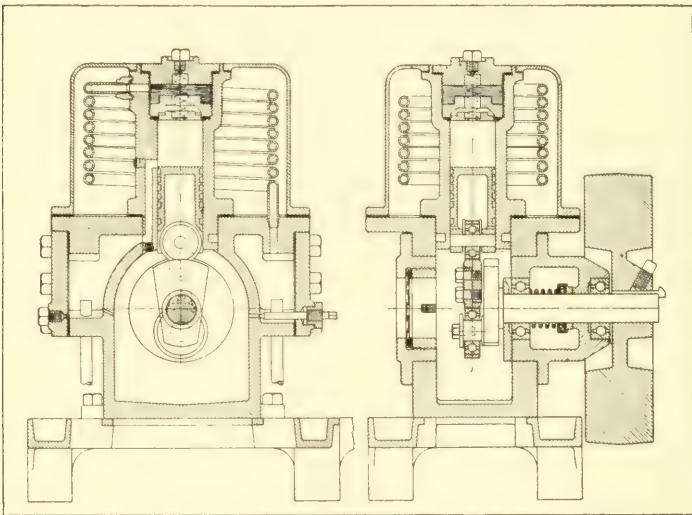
SECTIONAL VIEW OF COOKE REFRIGERATING MACHINE.
